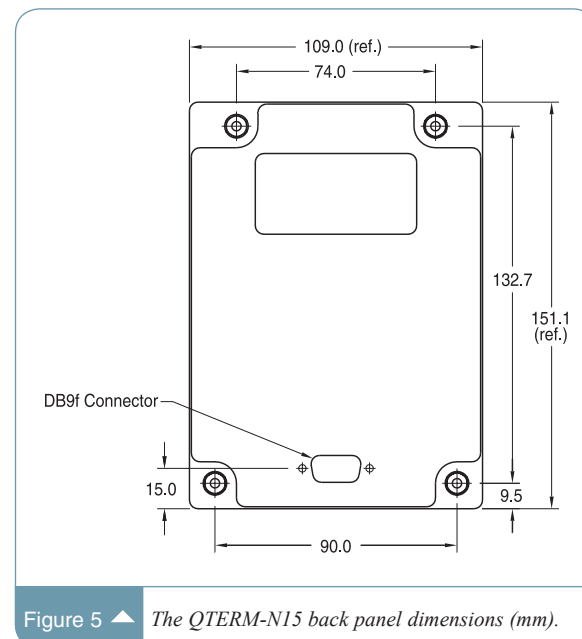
▲ The QTERM-N15 back panel dimensions (mm).
